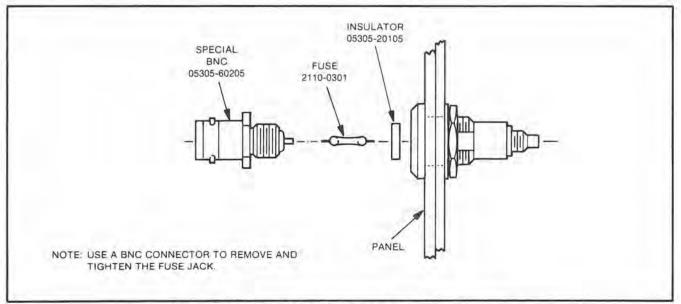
Details of Input Connector J1 and Fuse Mounting
